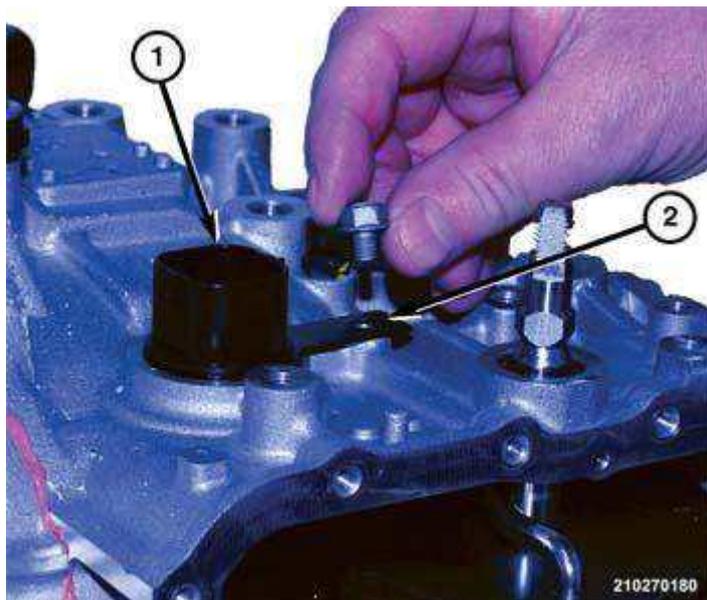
Hold Down Bracket, Wire Connector & Bolts
